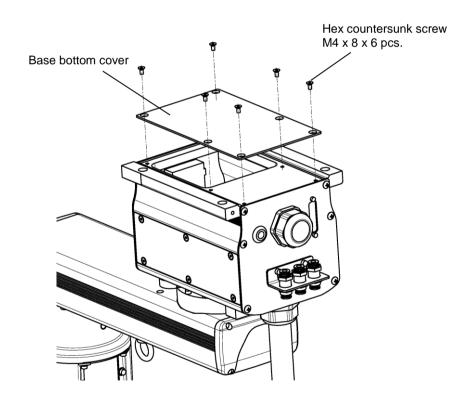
Base bottom cover (KHL-500, KHL-600, KHL-700)
